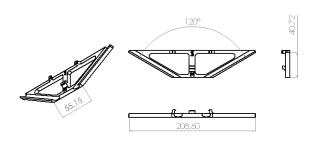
CAD Drawing of the V dipole guide, designed to fit the RTL-SDR V dipole [17]. All measurements shown are in millimeters.
